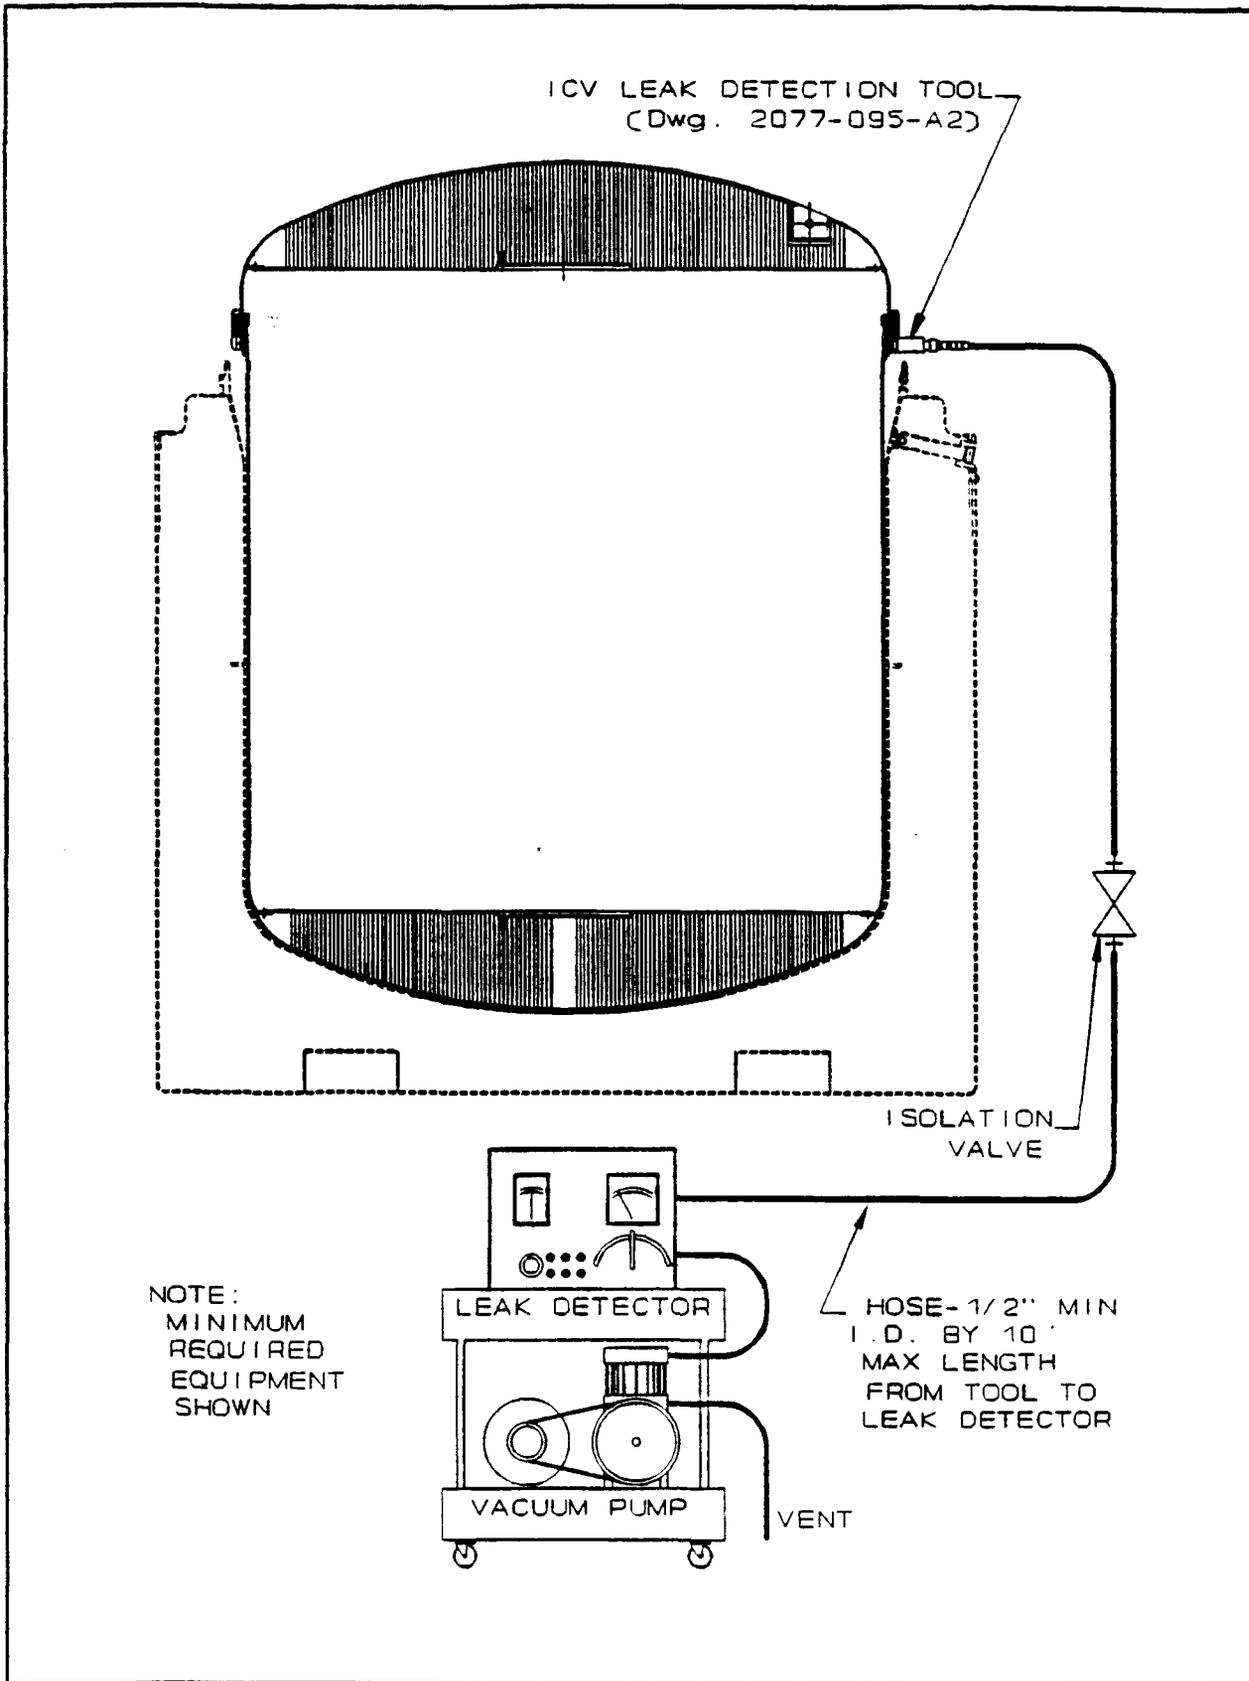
O-Ring Seal Leak Test Setup Support Arrangement for Assembled ICV
